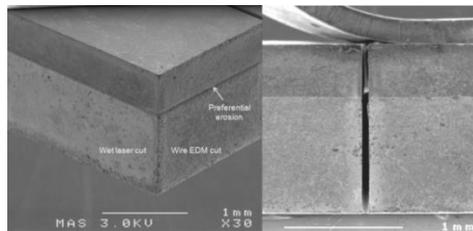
Left: SEM picture of a wire cut and wet laser cut (Laser MircoJet® cutting) PCD showing excessive EDM erosion at the PCD/HM interface. Right: An SEM picture of a cross-section through a parallel sided 50 μm wide kerf in 1.6mm PCD cut with the Laser MicroJet
